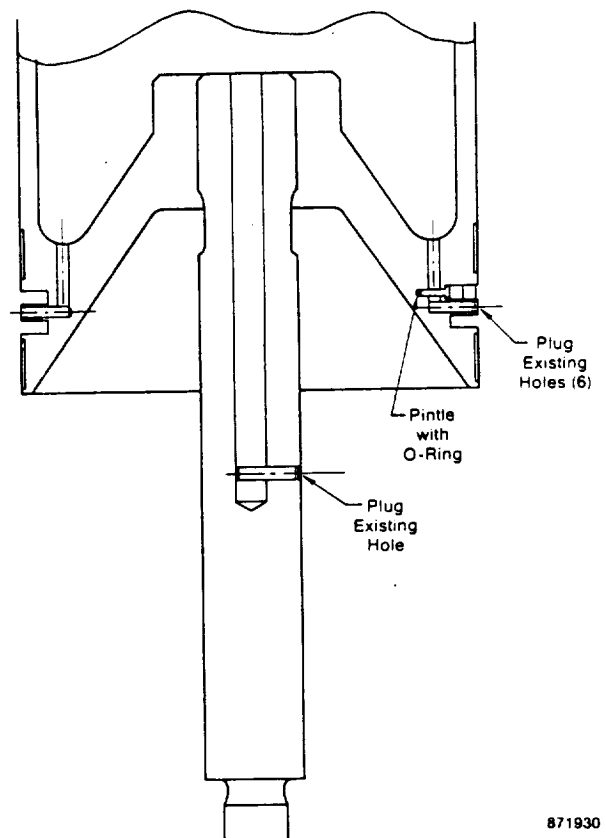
Mod II Piston Rod Modification to Use Single Solid Piston Rings
